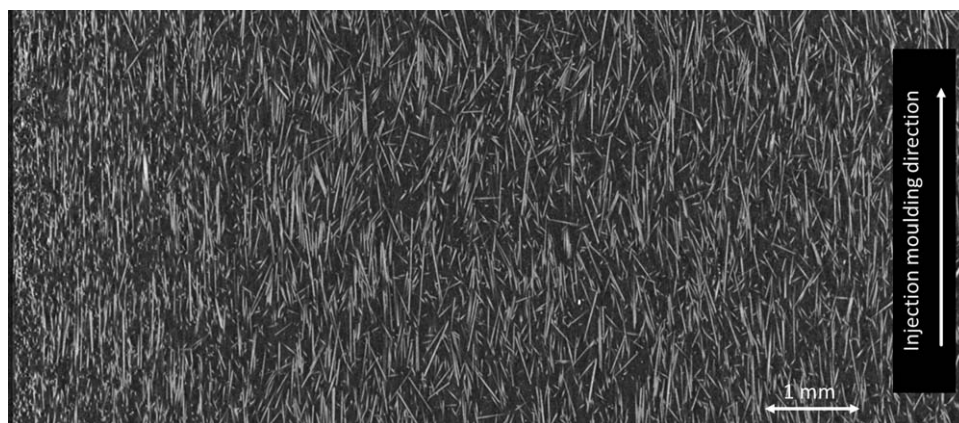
CT-photograph of a nontested standardized testing specimen without weld line (front view).
